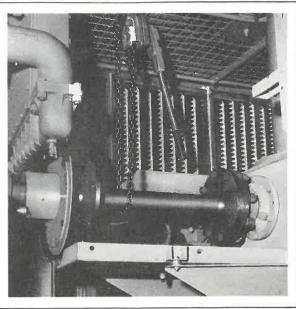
SUPPORTING FAN GEAR-UNIT SHAFT.
